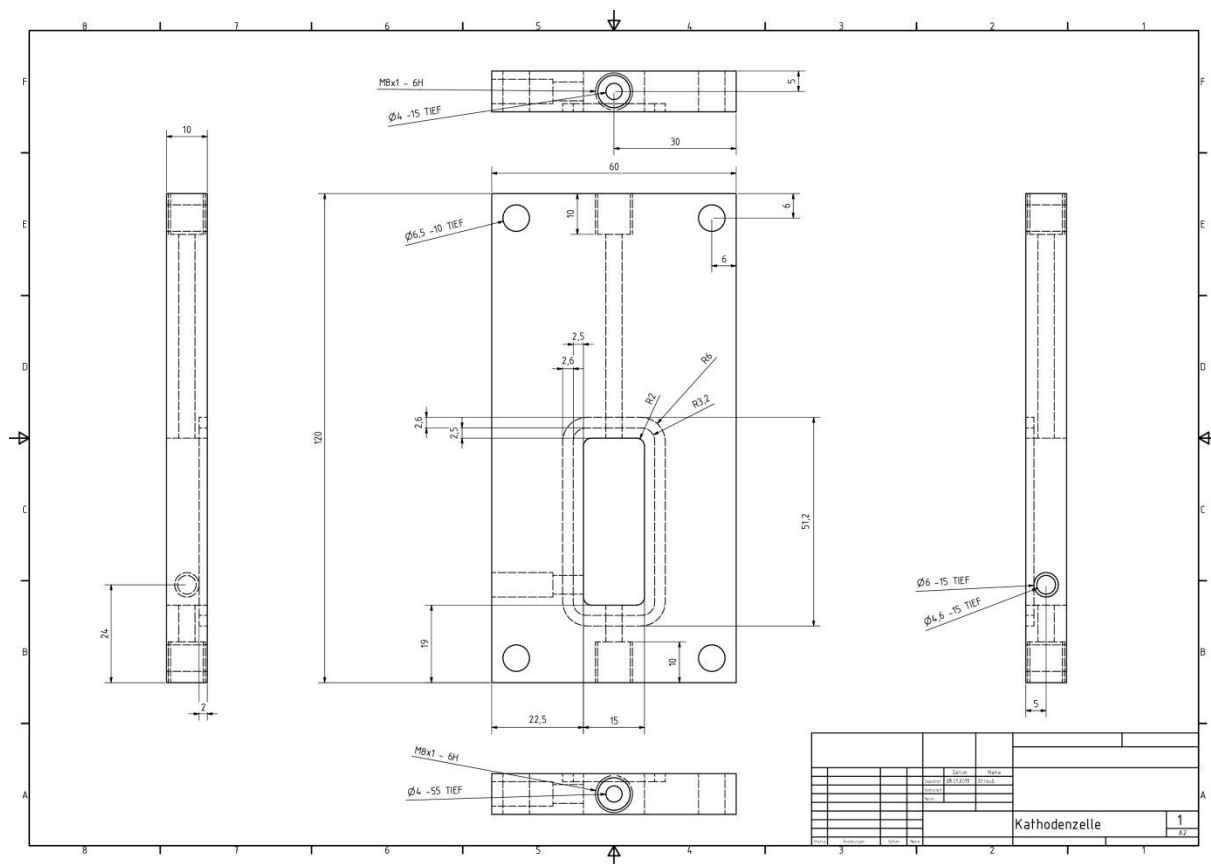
Technical drawing of the cathodic half-cell with bottom feed inlet.
